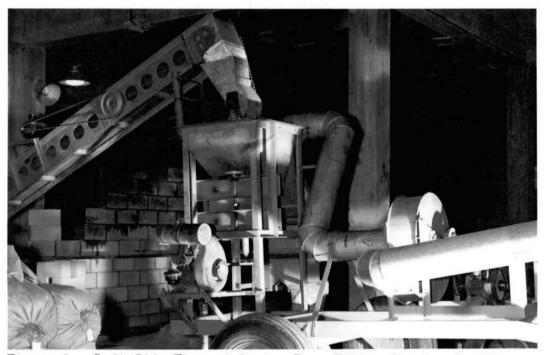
Left Side View of Castor Bean Huller Showing Position of Huller Engine and Handwheel Used to Adjust Spacing Between the Disks.
